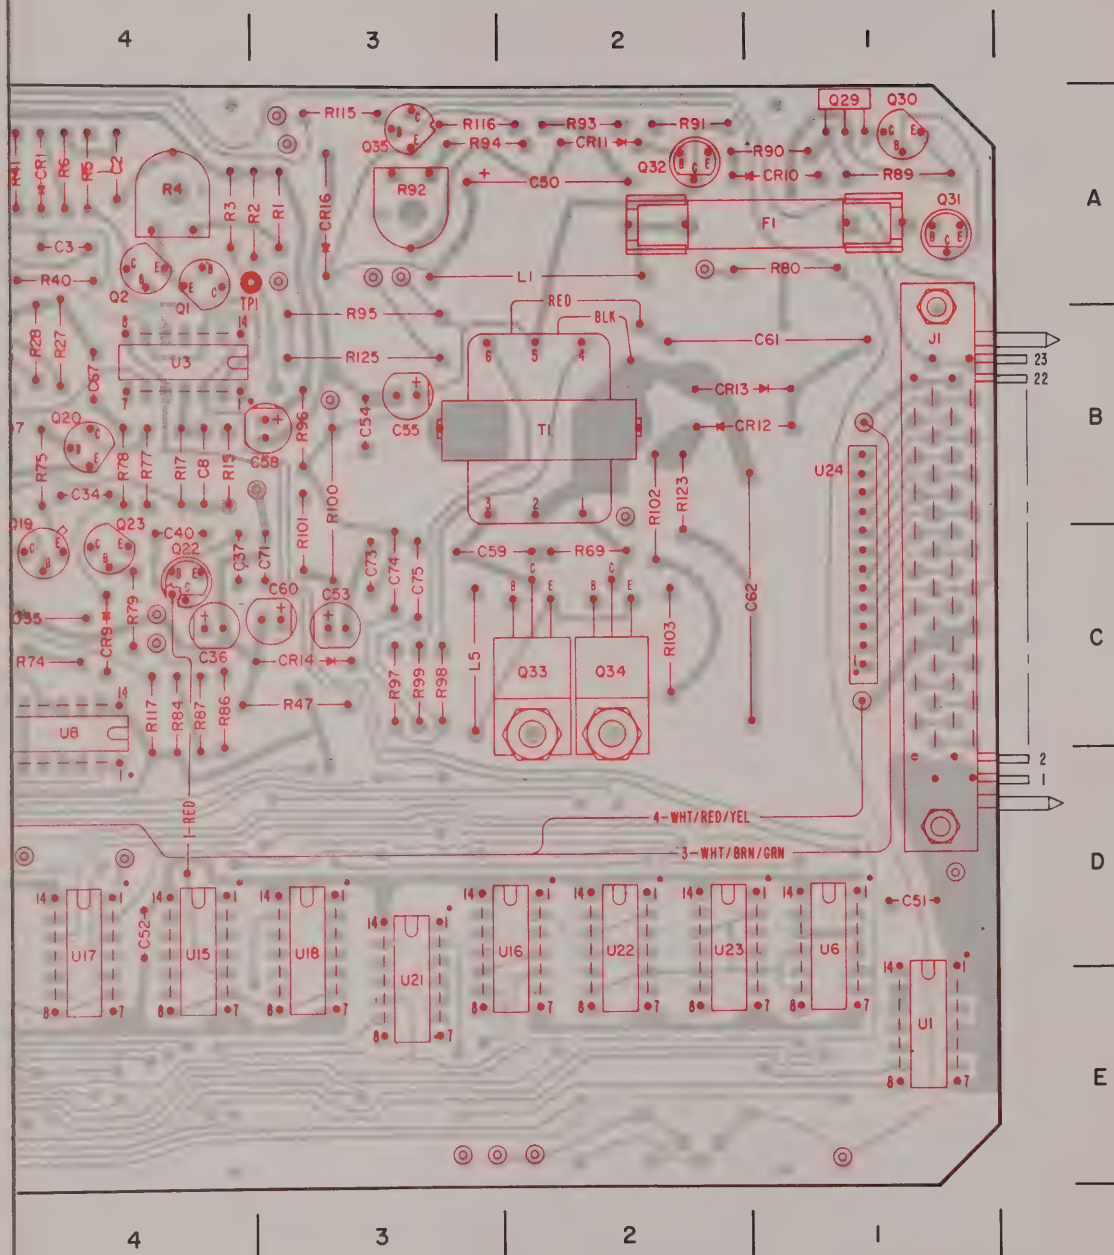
RT-459A Receiver-Transmitter, A2, Receiver Assembly, Wiring and Part Location Diagram
